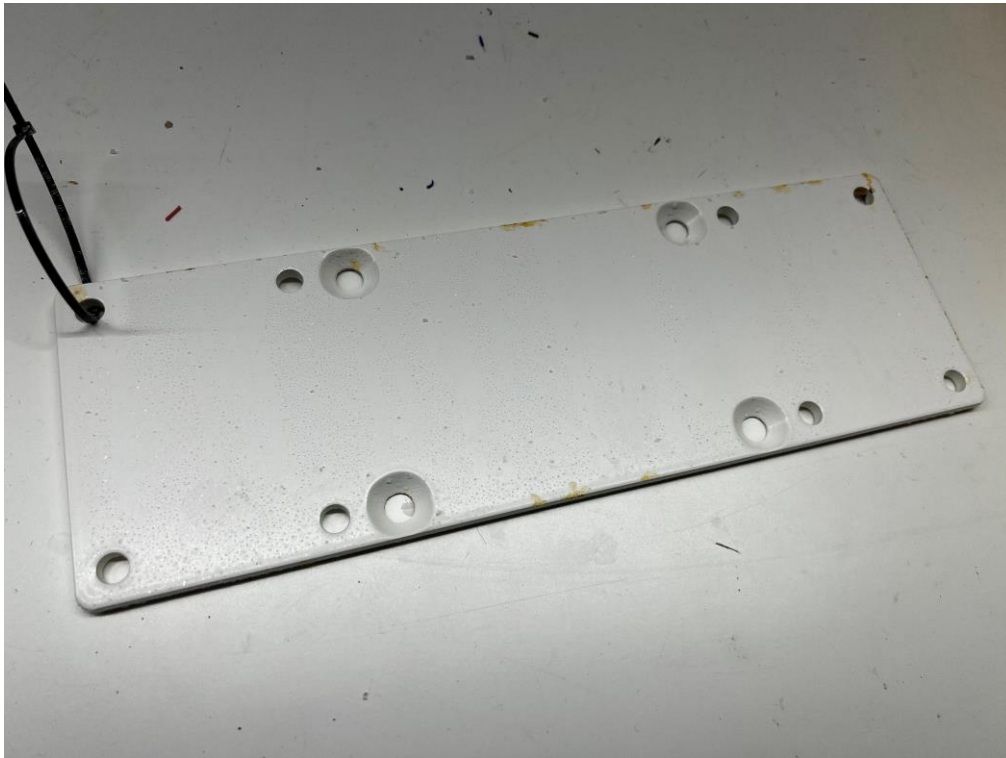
Visual inspection. (Saddle extension plate P/N: 20028) corrosion on scratches made by the client and along edges.
